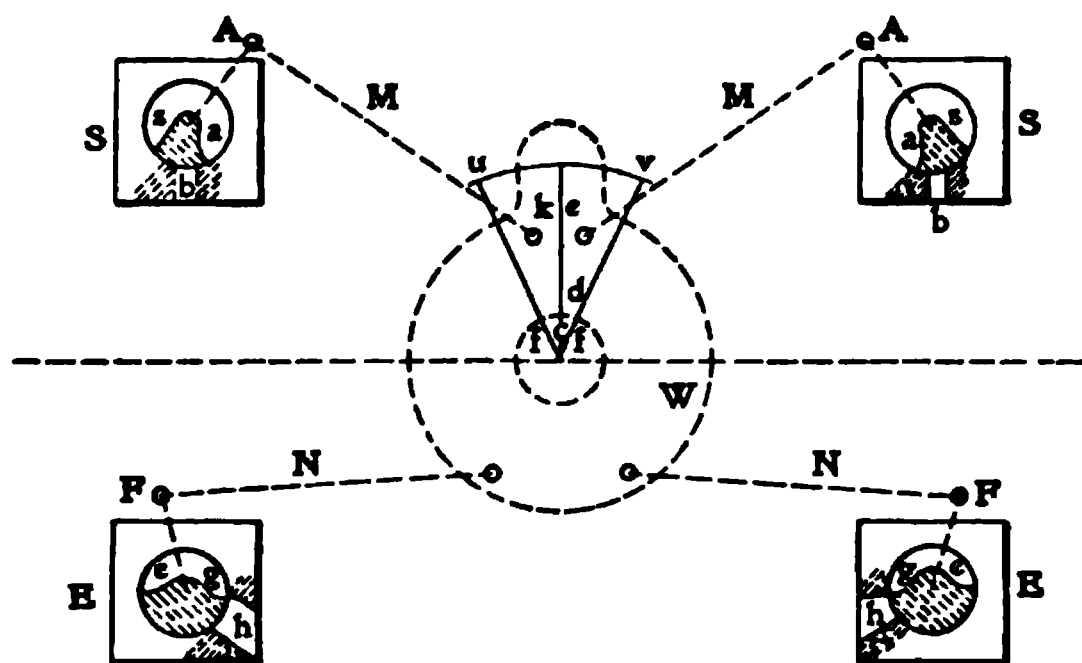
Diagram of a Corliss Valve Mechanism.
